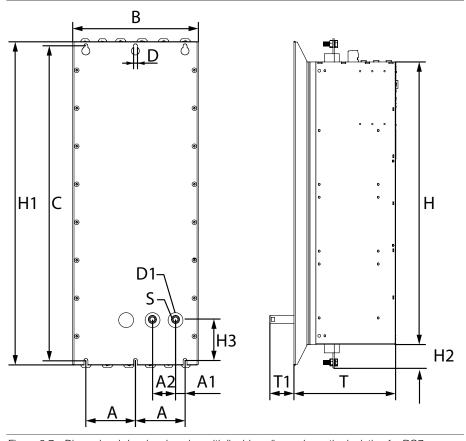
Dimensional drawing, housing with liquid cooling, schematic depiction for BG7
